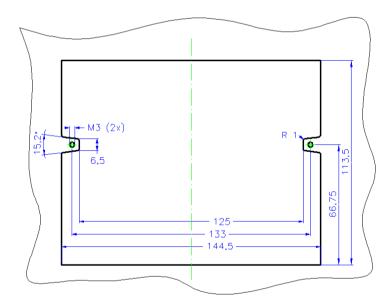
Dimensions for front panel installation of GPT-4454 in mm
